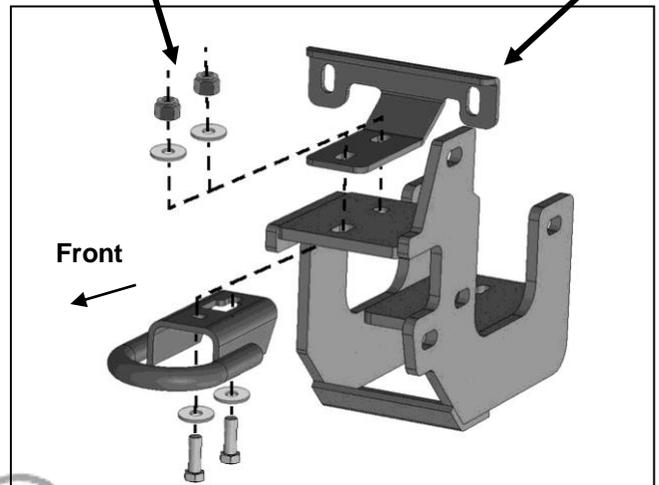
Slide Bracket assembly over end of frame. Attach assembly to Double Nut Plate in frame (Fig 5)
